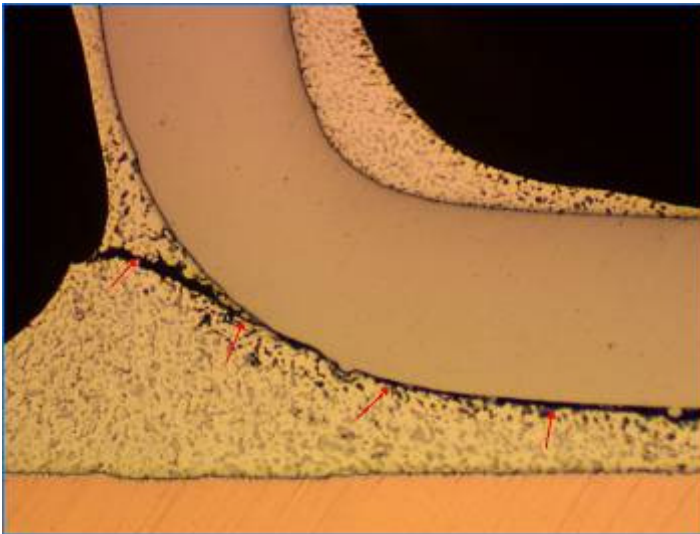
cross section, SN67, U61, right lead solder crack, 200xb
